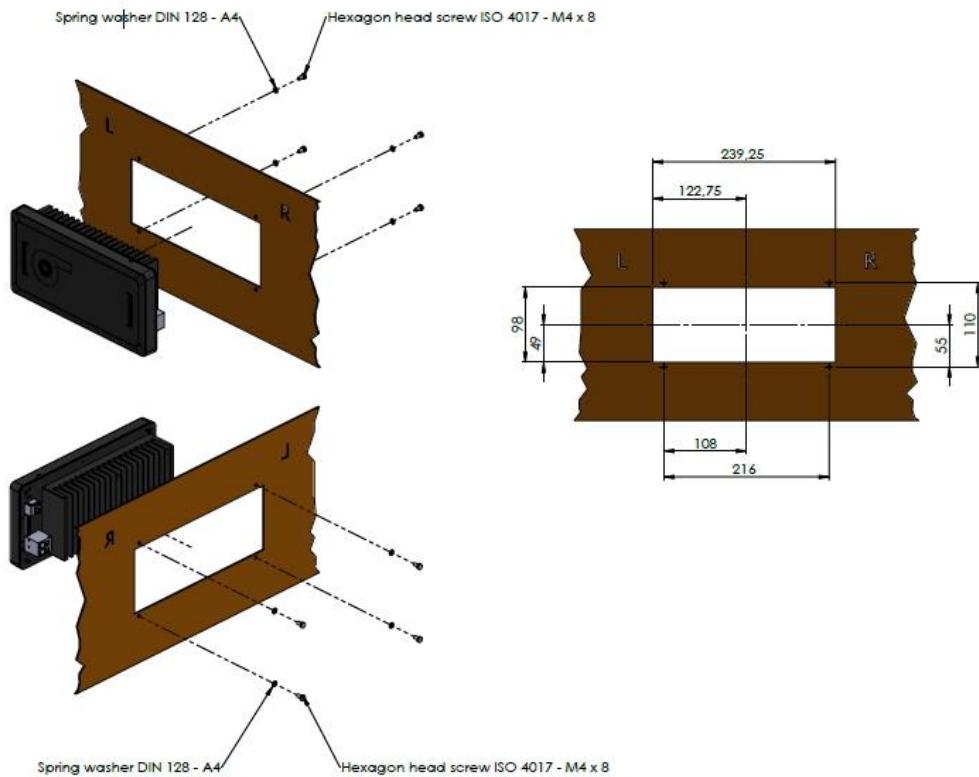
Cooling of the Bird with additional 40 mm fin heatsink
